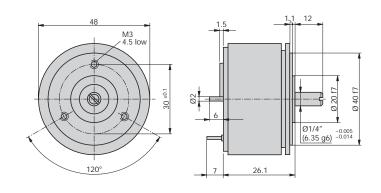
KINAX 2W2 with special drive shaft at front and at rear. At front: Ø 1/4", length 12 mm. At rear: Ø 2 mm, length 6 mm.
